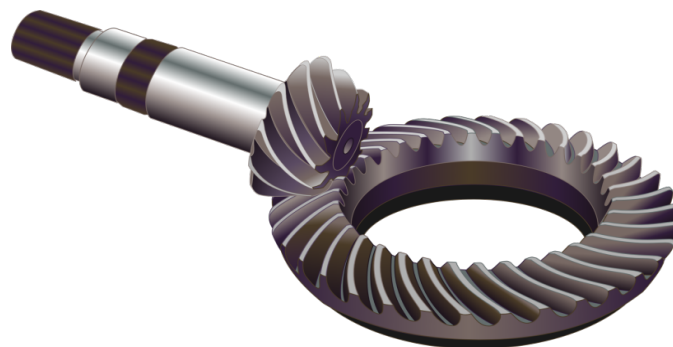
Bevel Gears (Thomas J.S. Cross. (n.d.). (PDF) generation of non-circular spiral bevel gears by face-milling method. A spiral bevel set)
